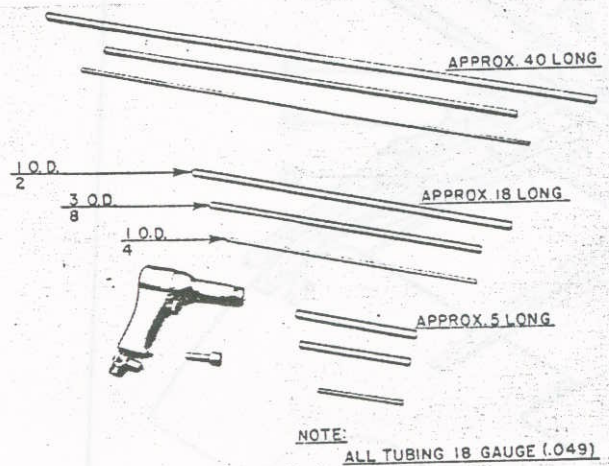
Air Gun Set and Hinge Wire Driving Equipment
